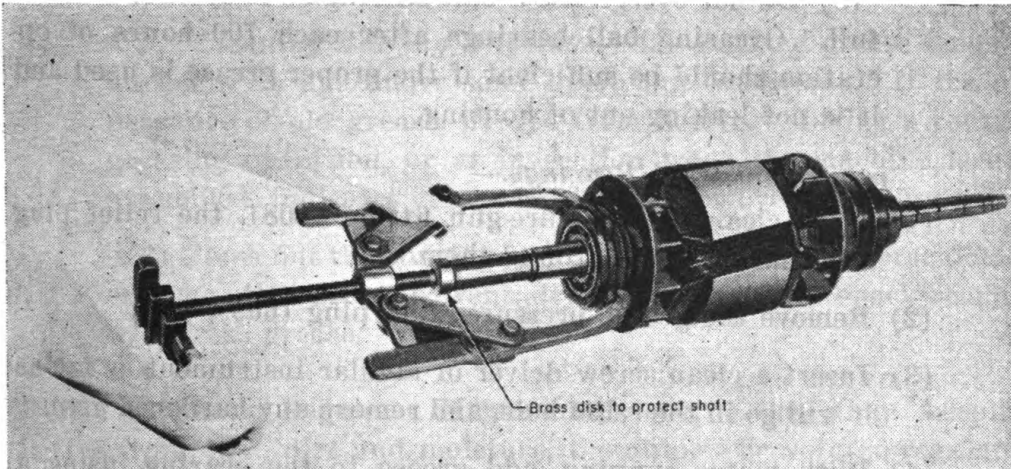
Removing Ball Bearing with Typical Bearing Puller
